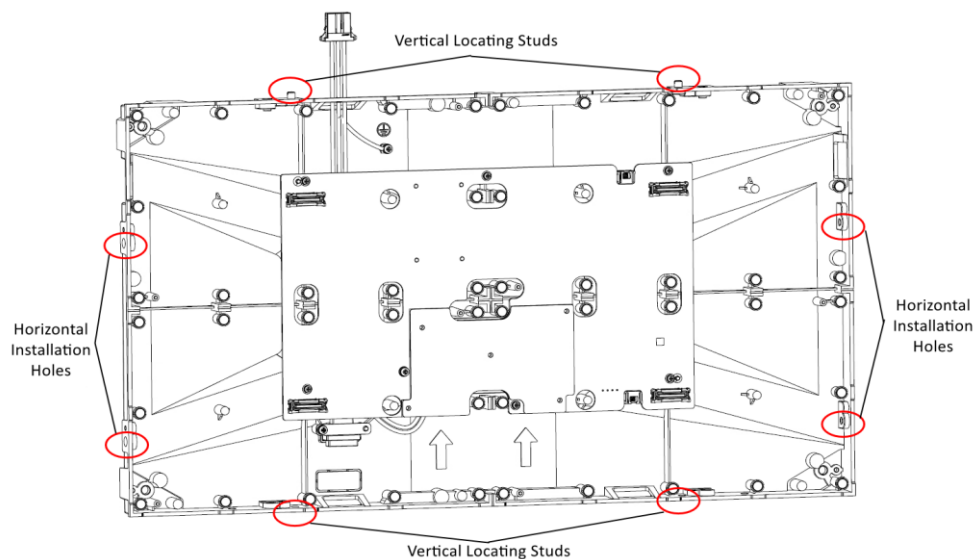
Locating Studs, Locating Holes and Installation Holes
